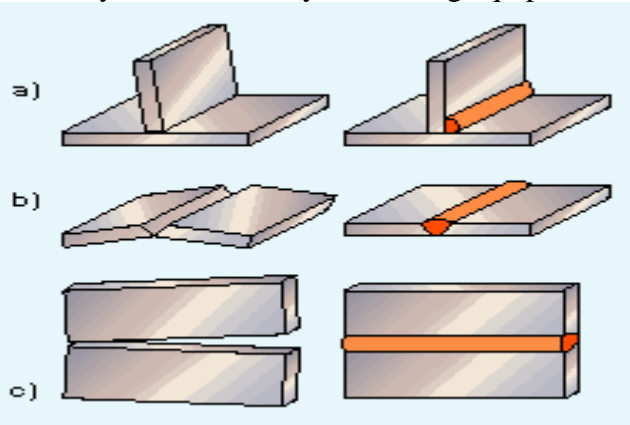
Pre-setting of parts to produce correct alignment after welding:
